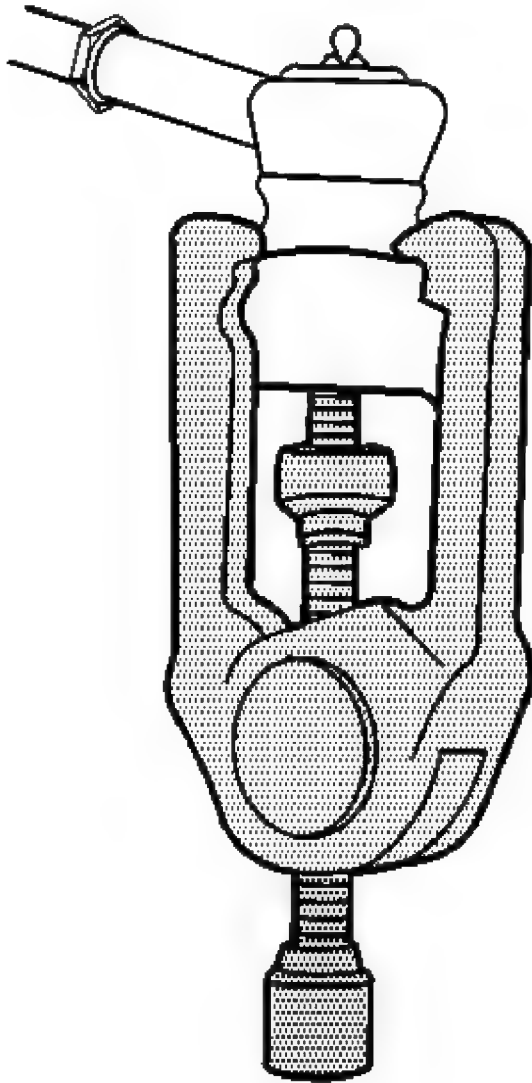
Removing Outer Tie Rod Assembly From Steering Knuckle
